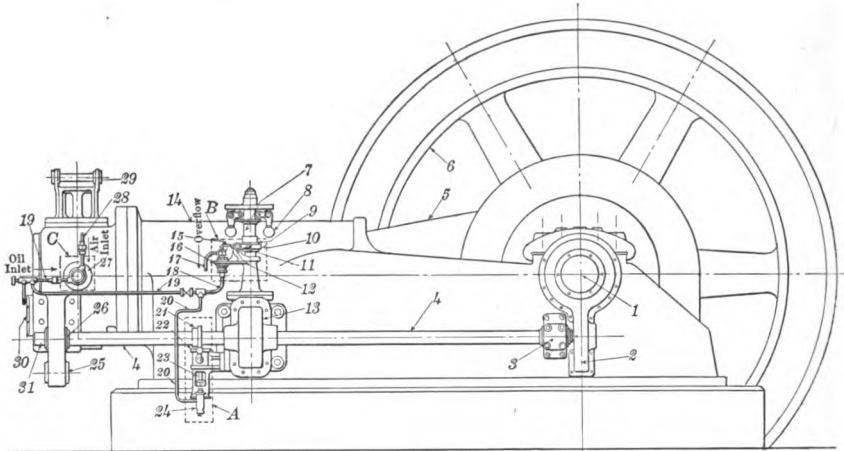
DE LA VERGNE OIL ENGINE, TYPE F. H.
